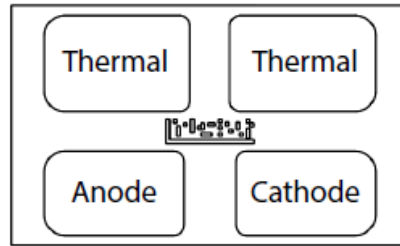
Recommended PCB solder pad layout for LUXEON Altilon SMD.
